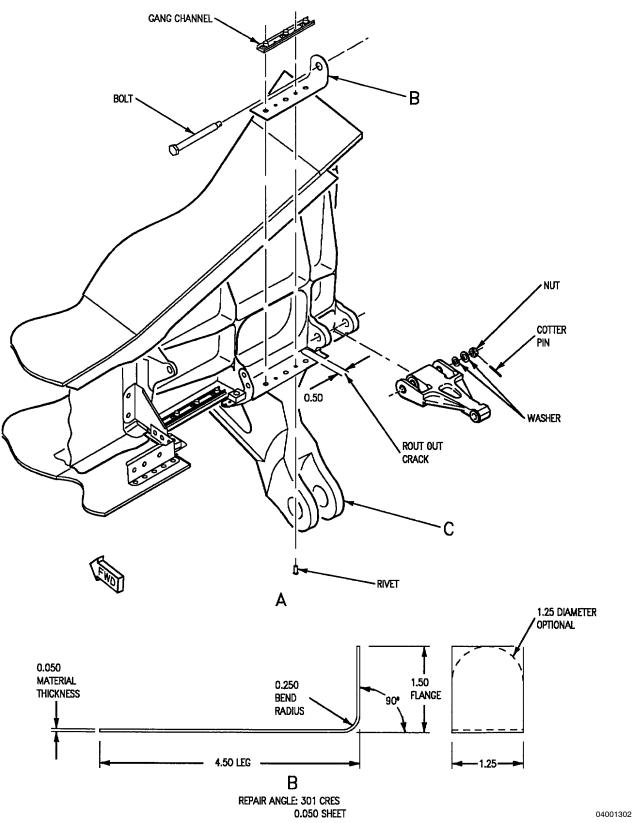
74A110959 Inboard Trailing Edge Flap Hinge Half Cracked Flange Repair (Sheet 2)
